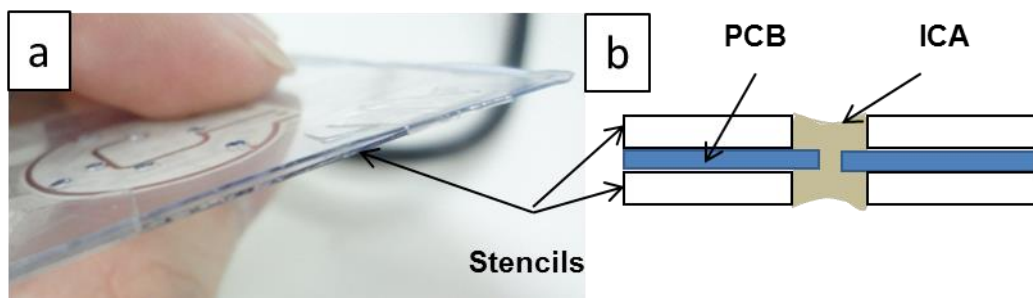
6 a) Stencils arrangement: the two stencils were fixed by adhesive tape after alignment, b) a sketch of cross-sectional stencil printing setup
